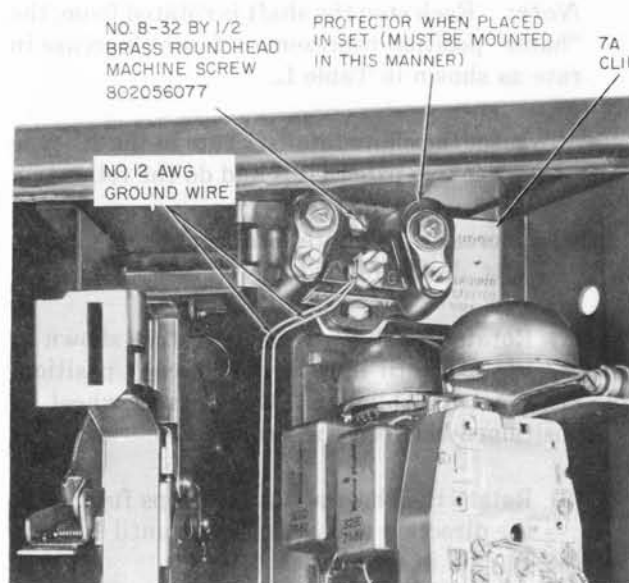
123A1A (DA) or 123E1A Protector Installed in Panel Set
